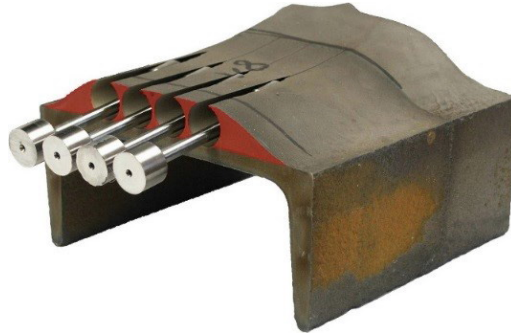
Bulk material of the IN625mod coating (marked in red) on the U-shaped steel profile.
